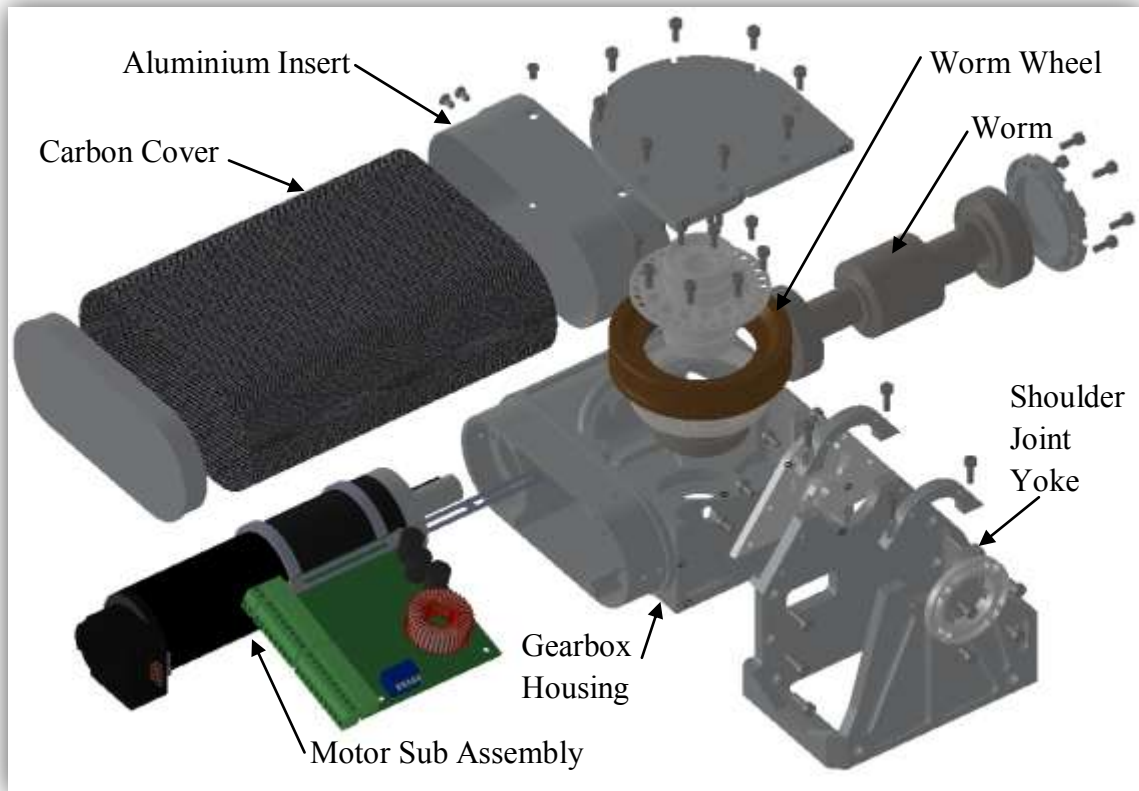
Exploded View of Turntable Section of Manipulator Arm
